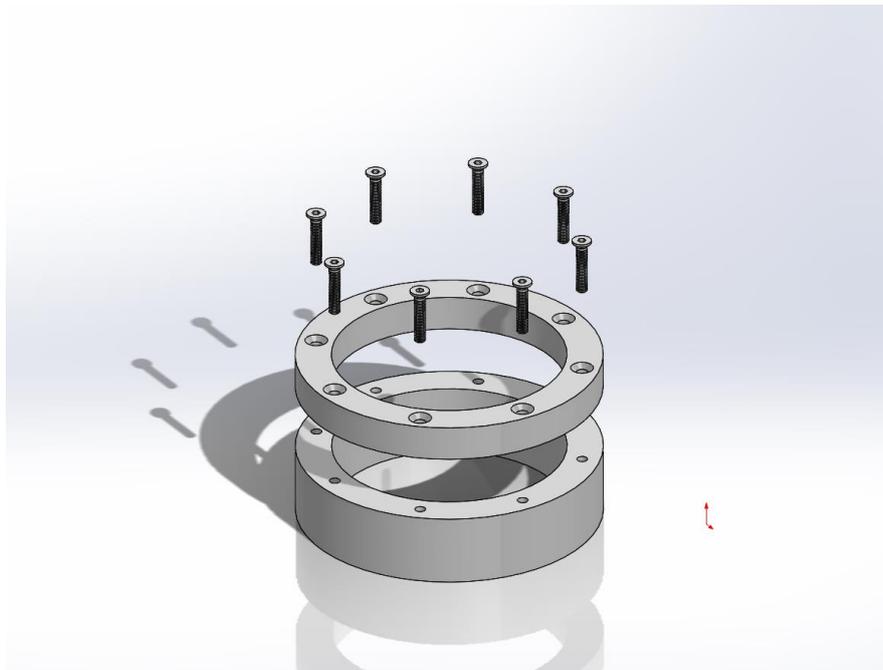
3D rendering of the lower polarizer assembly in Solidworks, excluding the polarizing film
